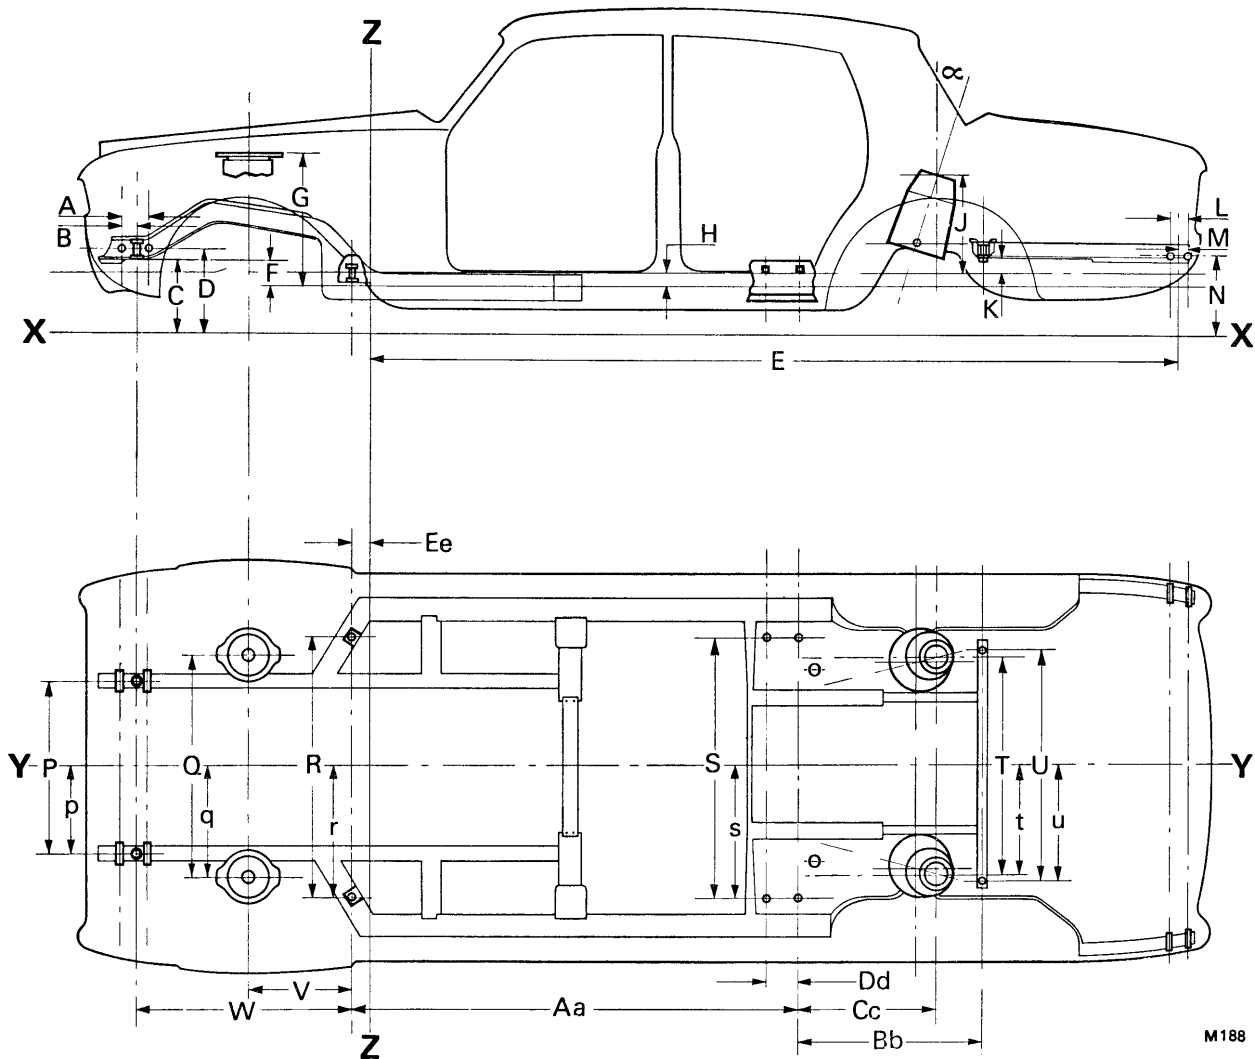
SUGGESTED BODY MOUNTING FIXTURE
